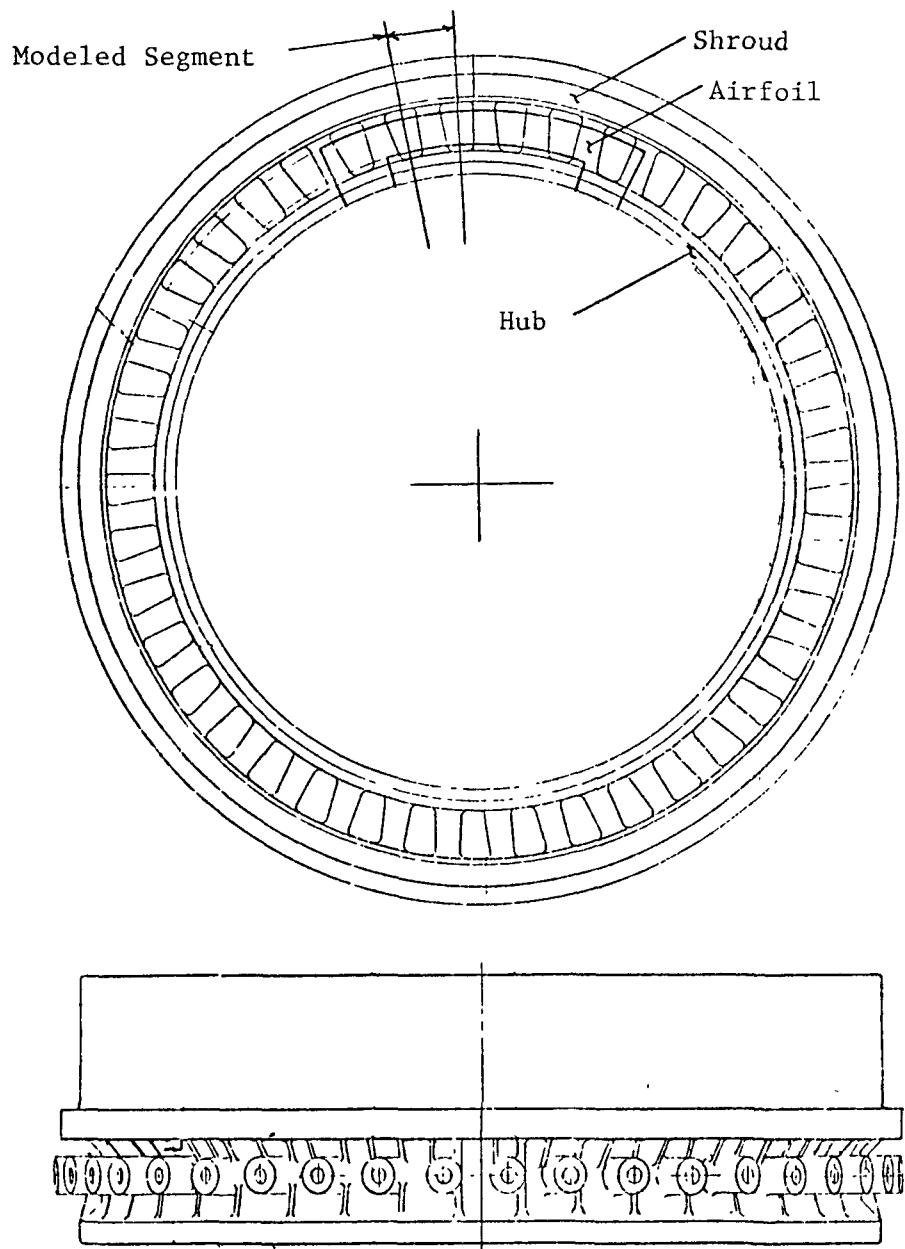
Typical Nozzle Casting Showing Modeled Segment
